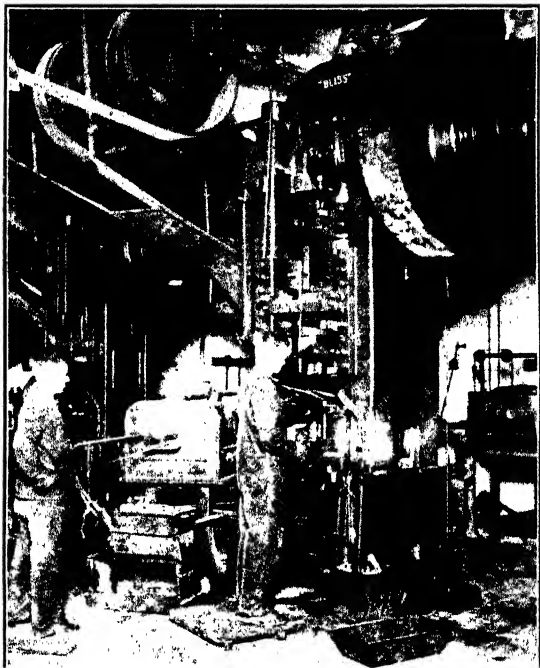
A forging press producing brass forgings from sawed slugs, finishing between 600 and 700 pieces per hour.
